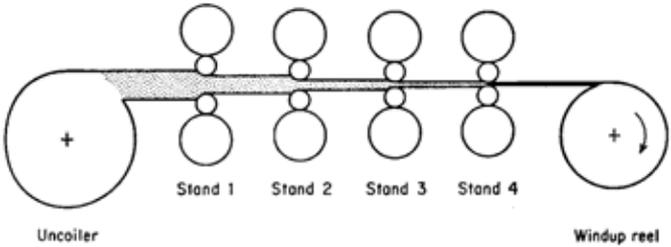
Schematic drawing of strip rolling on a four-stand continuous mill.
